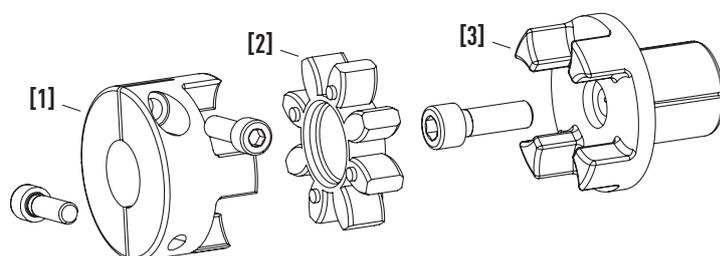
Coupling assembly variant 2: clamping hubs with two clamping screws
